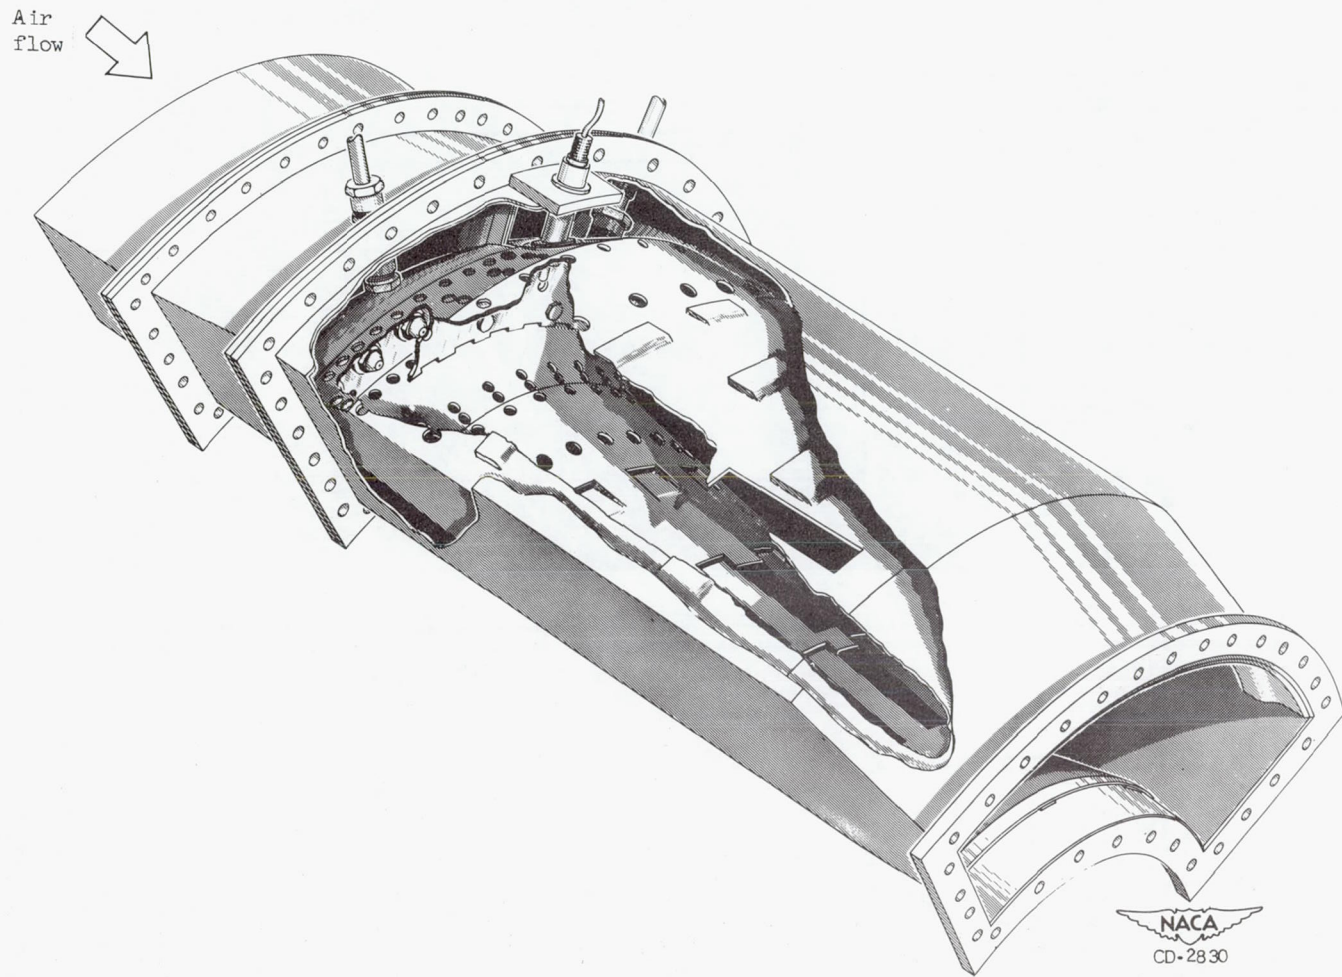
One-quarter sector of model 13 annular combustor assembled in test ducting.
